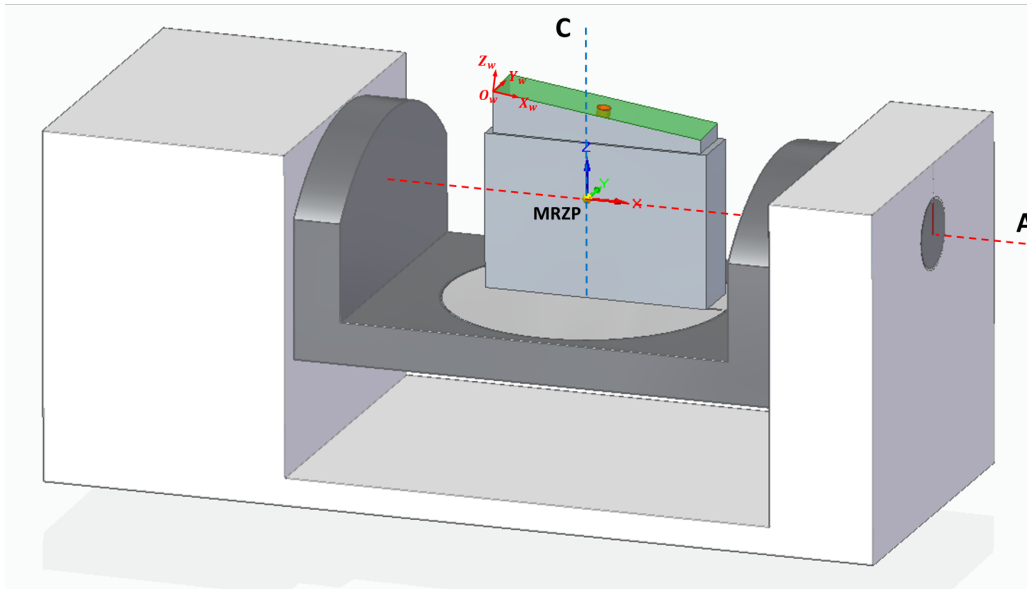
Illustration of the initial position of rotary table with clamped demo part
